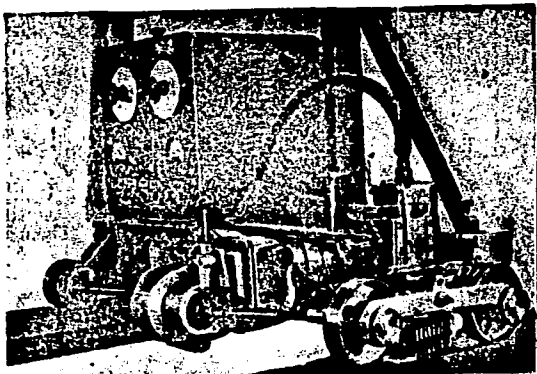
General view of a machine for welding large-size work by gas heat carriers.
